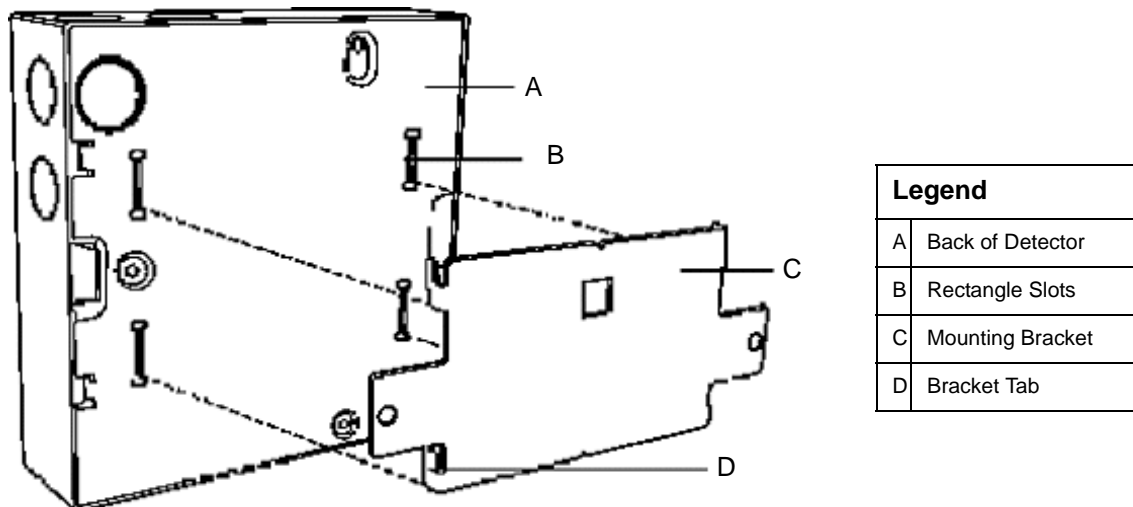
Mounting the LaserCOMPACT detector onto the mounting bracket
